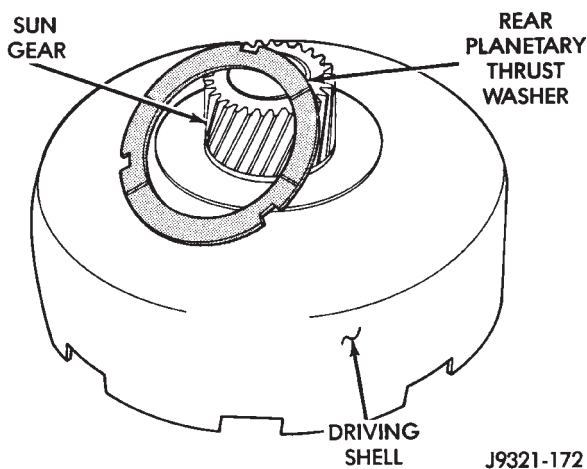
Rear Planetary Thrust Washer Removal (46RH)
